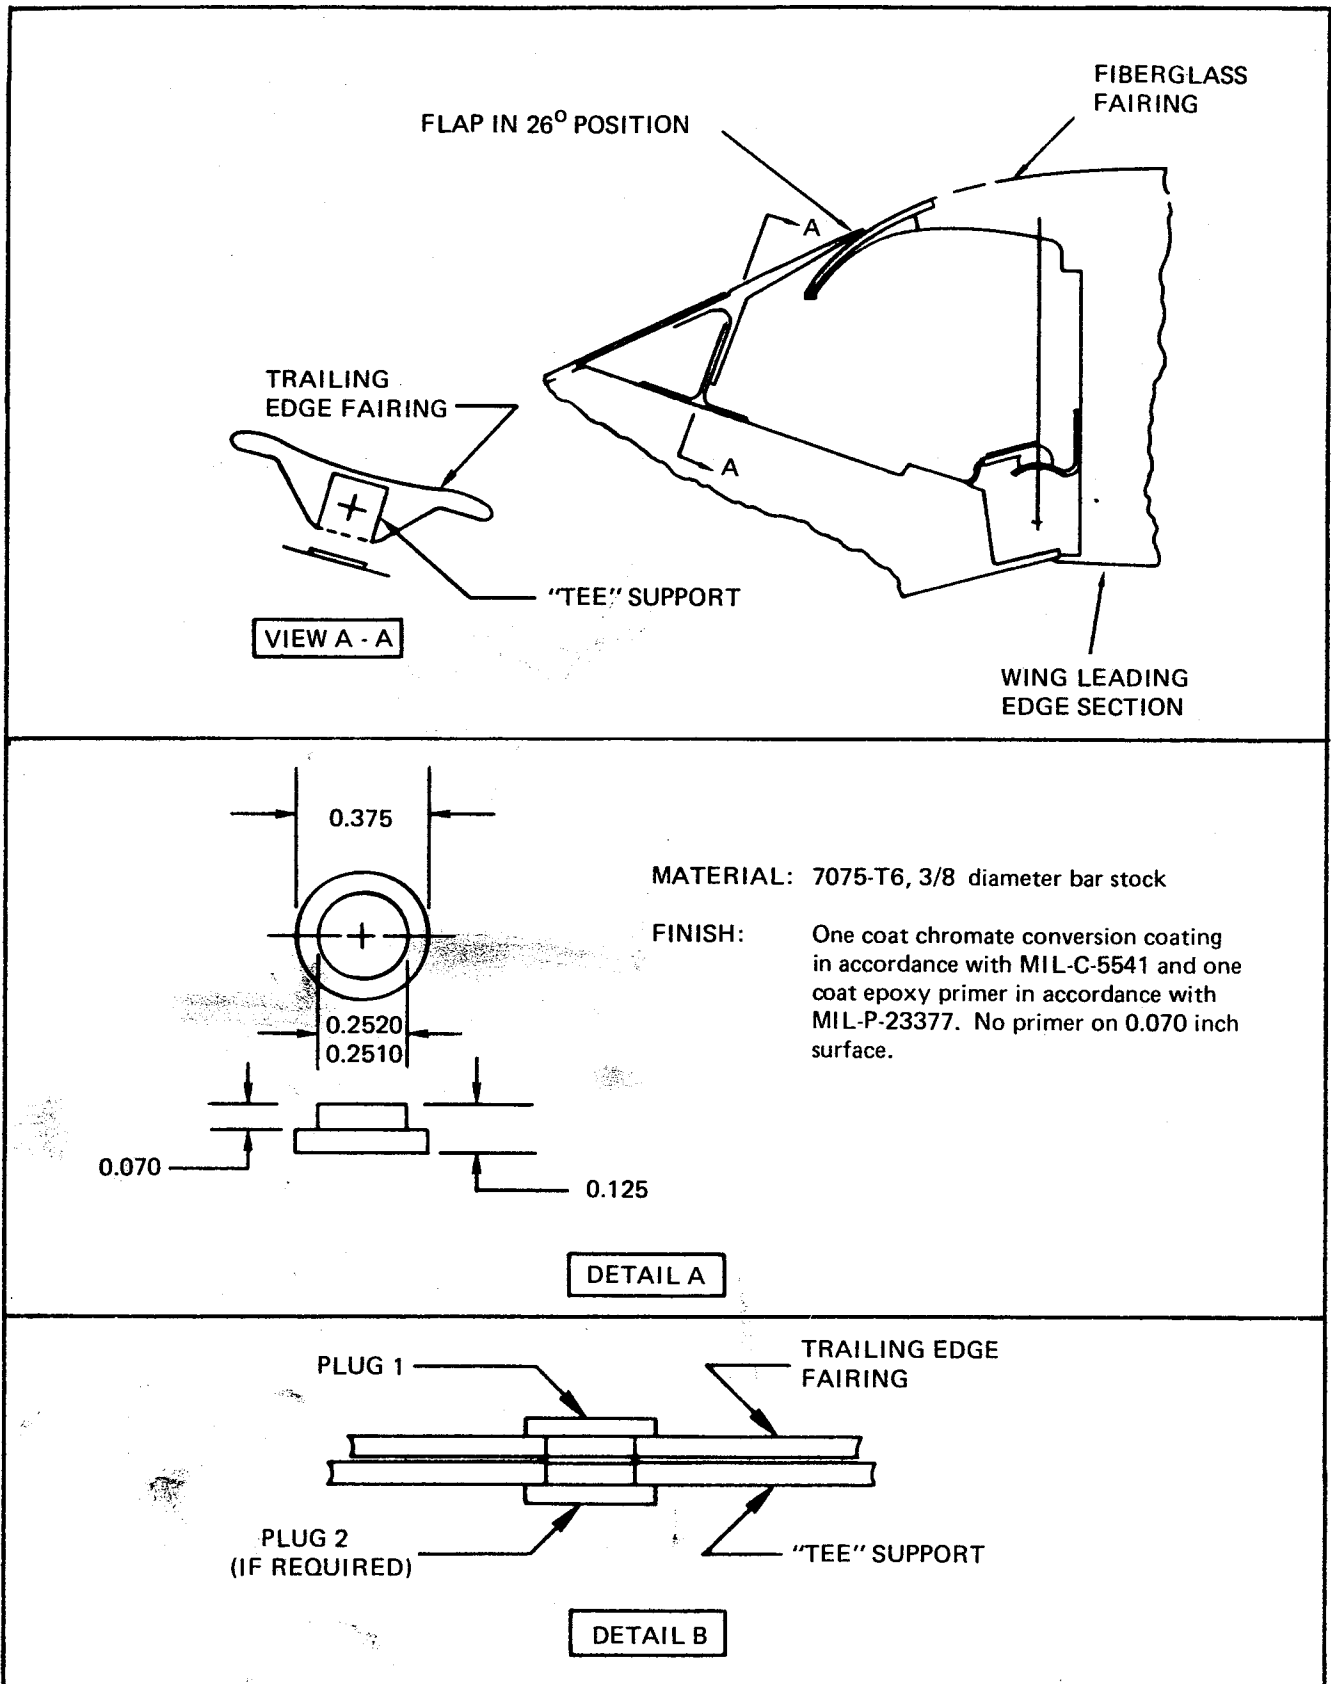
A. Alternate Method of Adjusting Leading Edge Flap Gap (Sheet 1)
